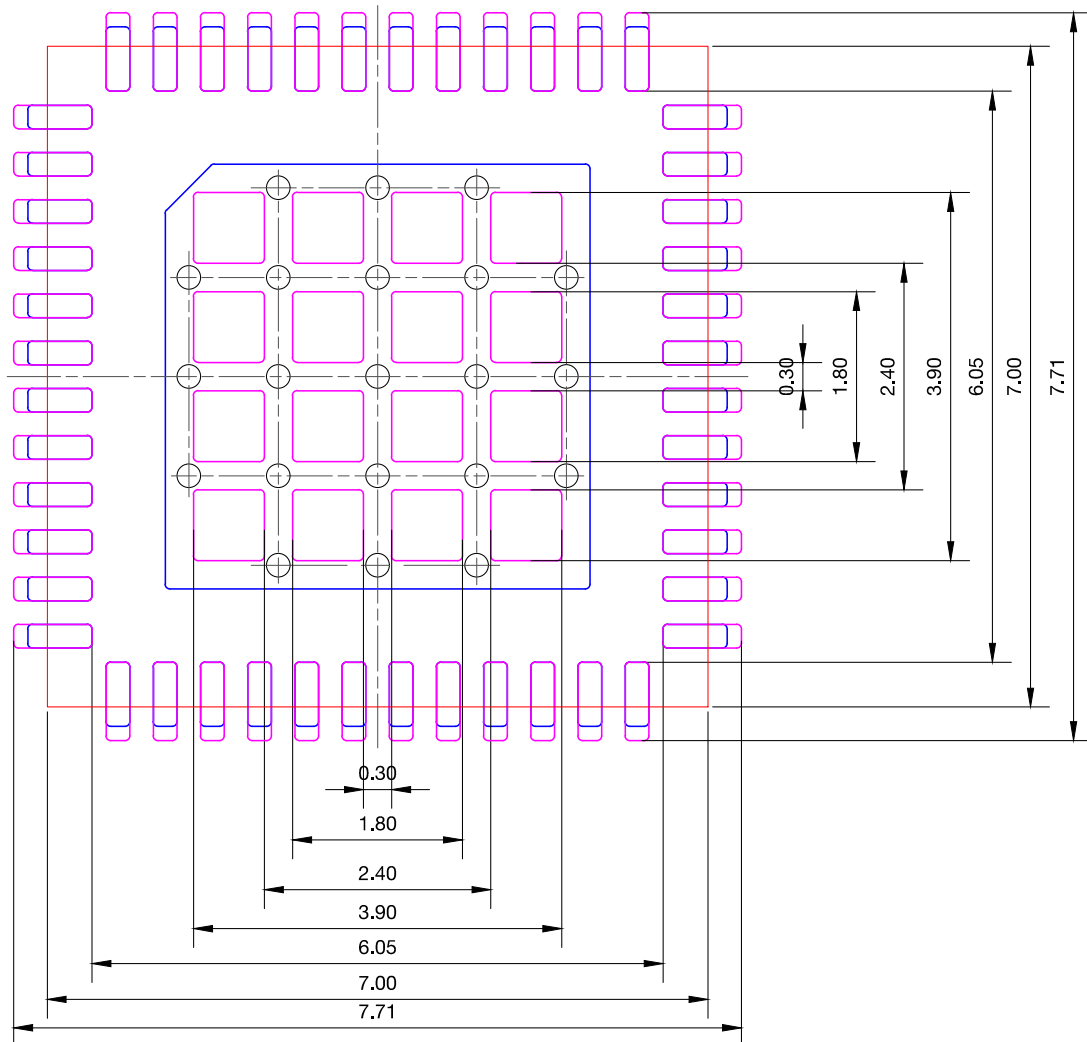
ESP32-PICO-V3 PCB Land Pattern
